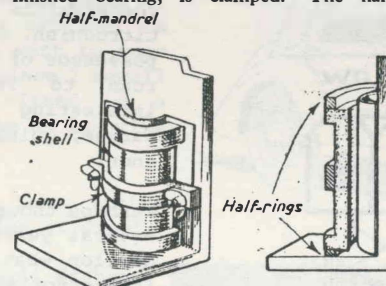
A simple pouring jig made from an angle-plate sheet, iron mandrel and clamp. The sectional sketch shows the use of the half rings if the bearing metal is to be built up over the edges of the bearing.
